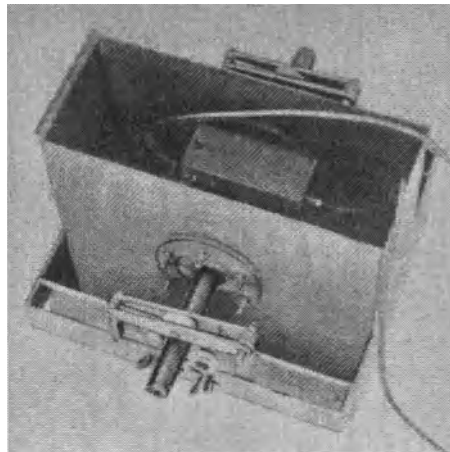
Transit tank with sealed windows for testing round bar or tubing by the immersion technique
